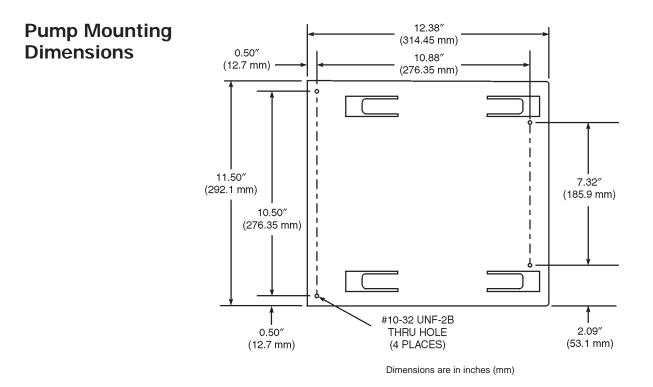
RAPID-LOAD PUMP ASSEMBLY
